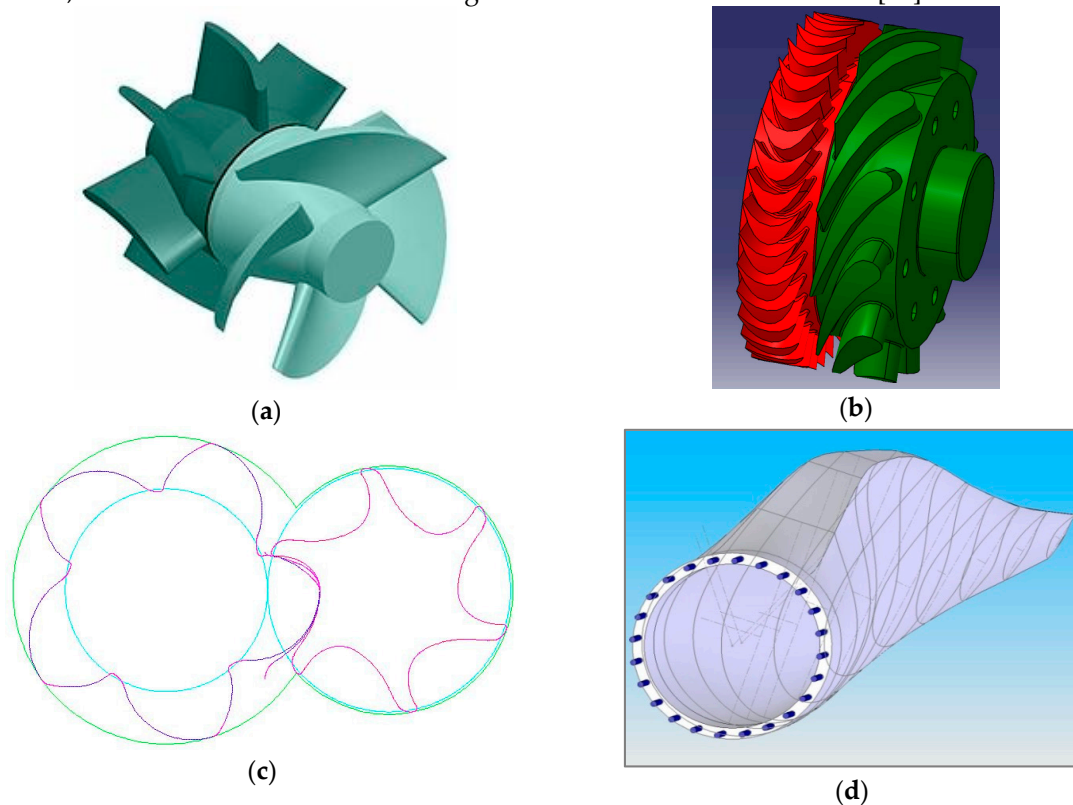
Rotating machine geometry (a) Axial fan; (b) Axial Impulse turbine; (c) Screw compressor (d) BSDS rotor blade[20]
